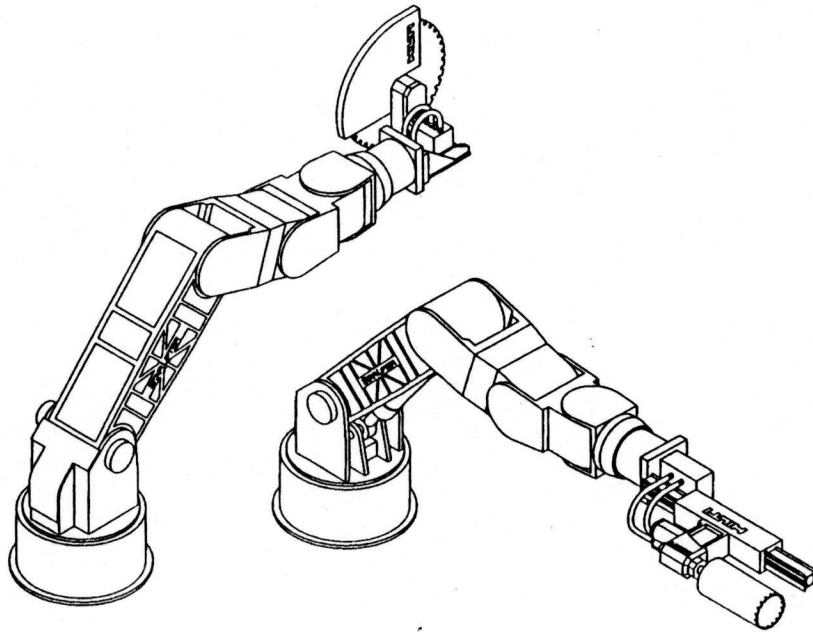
A robotic-action-head type electro-hydraulic manipulator for the deployment of heavy active-tool systems
